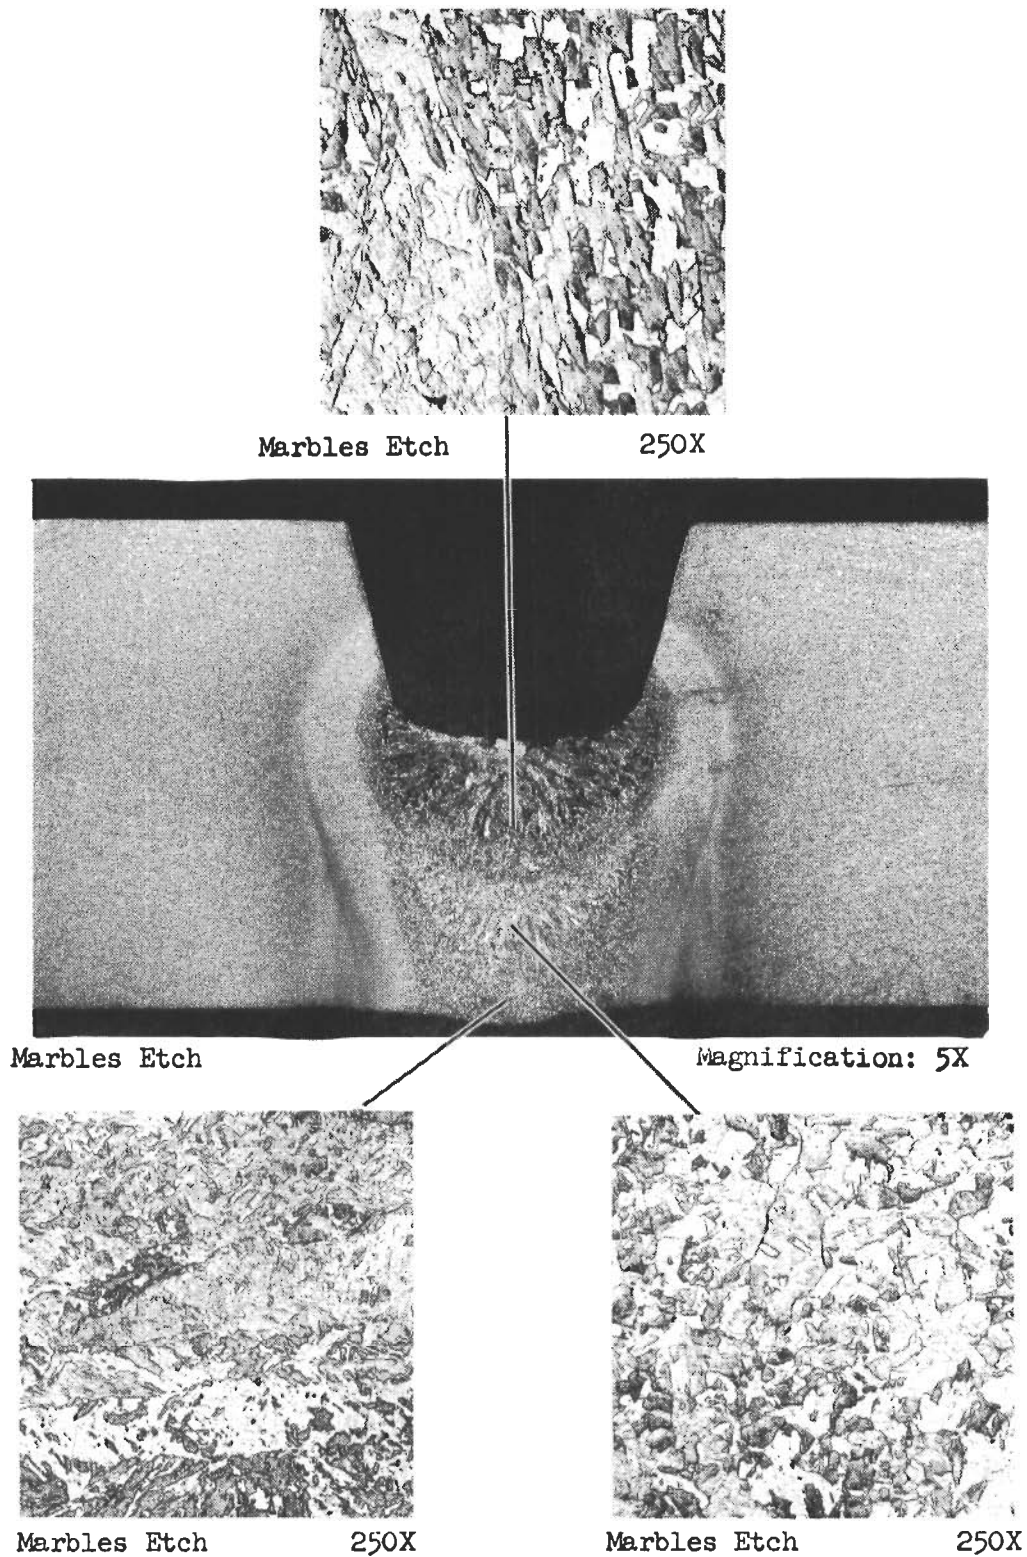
Weld-Metal Microstructure-As Welded. Five TIG Weld Passes in Grade 250, 1/2-In.-Thick, 18% Nickel Maraging Steel Plate, Heat 120D163, Filler Wire 7C-093
